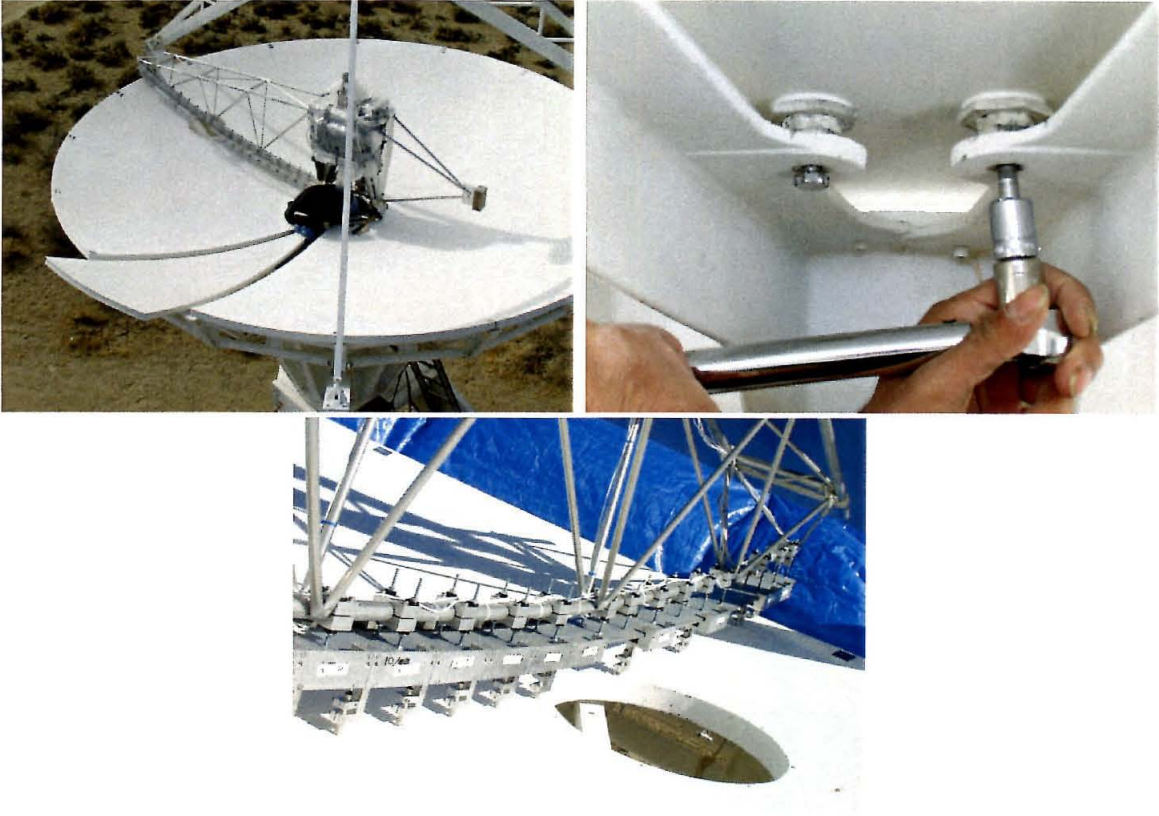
Surface setting campaign. Top left: photo taken during installation of a previously unused panel. Top right: reattachment of panel to telescope support after shim thickness had been changed. Bottom: close-up of the measurement arm and capacitive sensors; panel in photo was later replaced.
